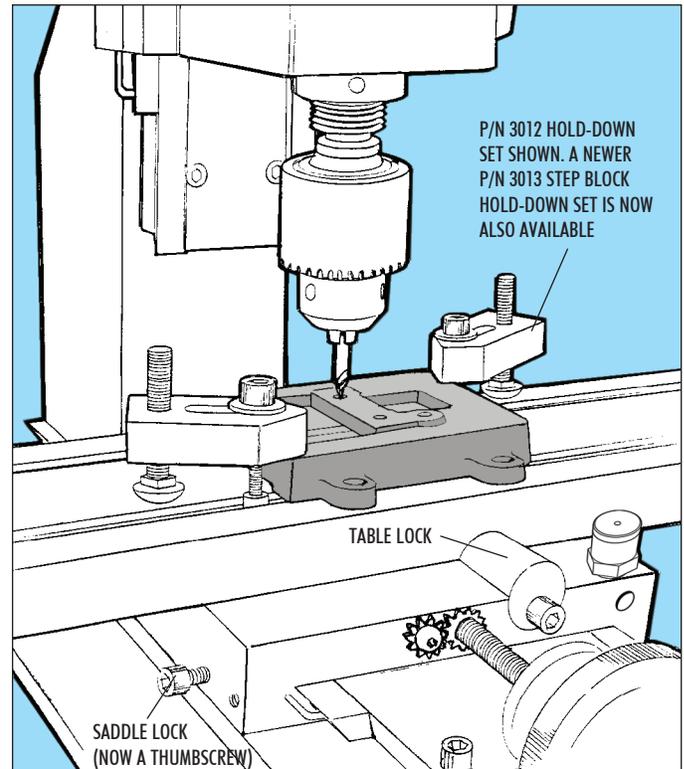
Large or odd shaped parts are usually clamped to the mill table as shown here. Smaller parts can be held in a milling vise. Here a center drill is used to accurately locate the holes to be drilled in a clamped part.
